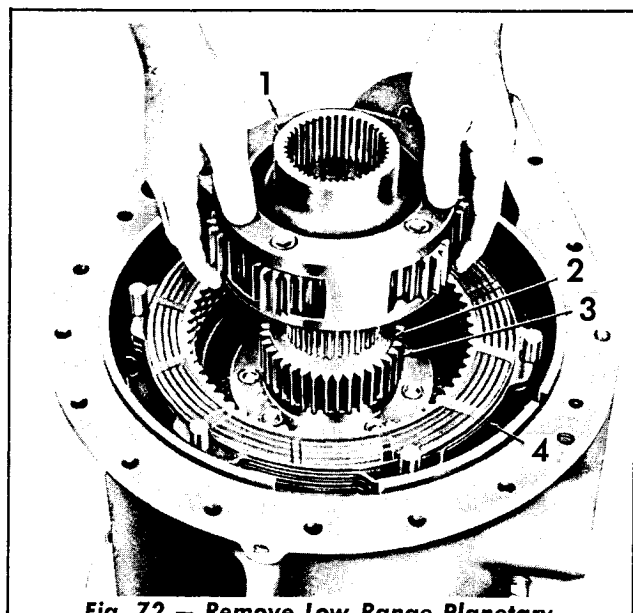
Remove Low Range Planetary Carrier Assembly
